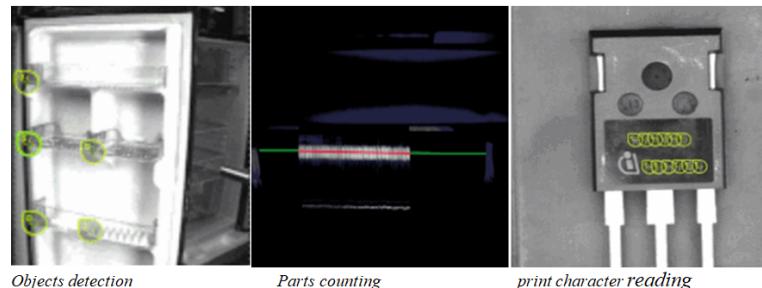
Objects detection,parts counting, print character reading Examples [20]
